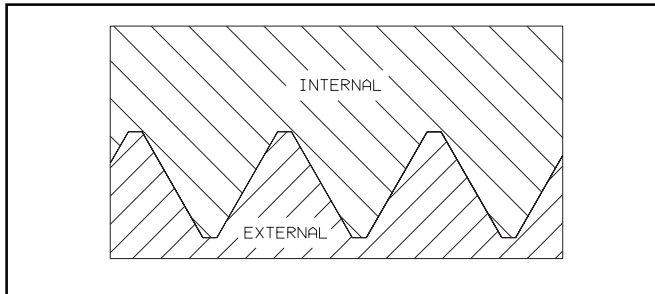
NPTF — Wrench Tight-Crest to Root and Flank Contact
